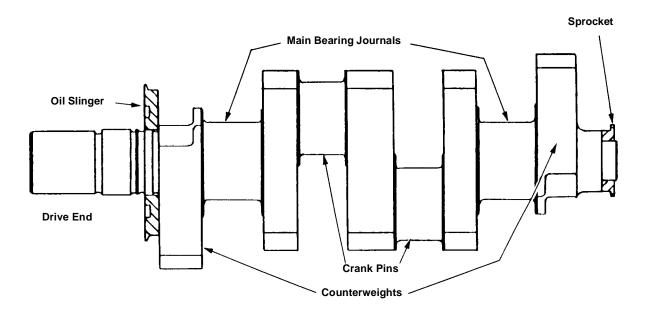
CRANKSHAFT - TYPICAL STUBSHAFT
